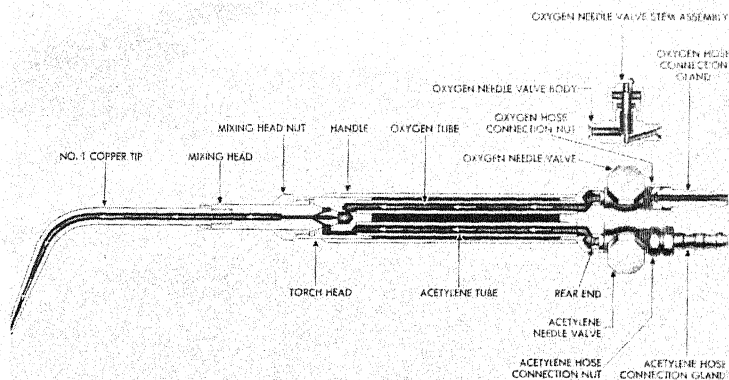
Equal-pressure type general purpose welding torch.
